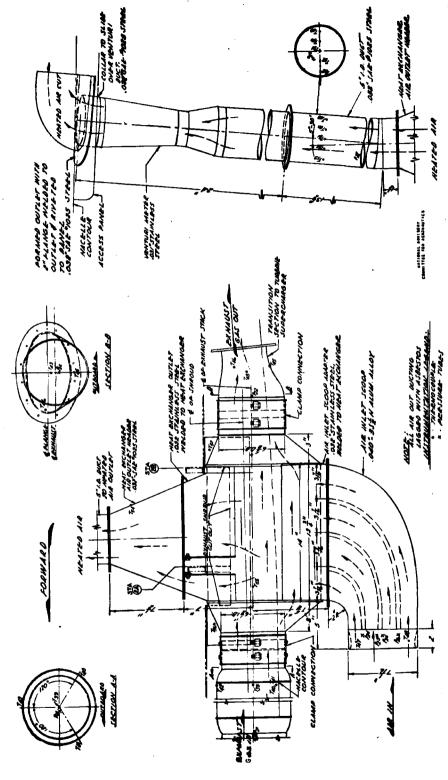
MEAT EXCHANGER I INSTALLATION IN MACELLE I. SIDE VIEW, 8-17- MIRPLANE.
